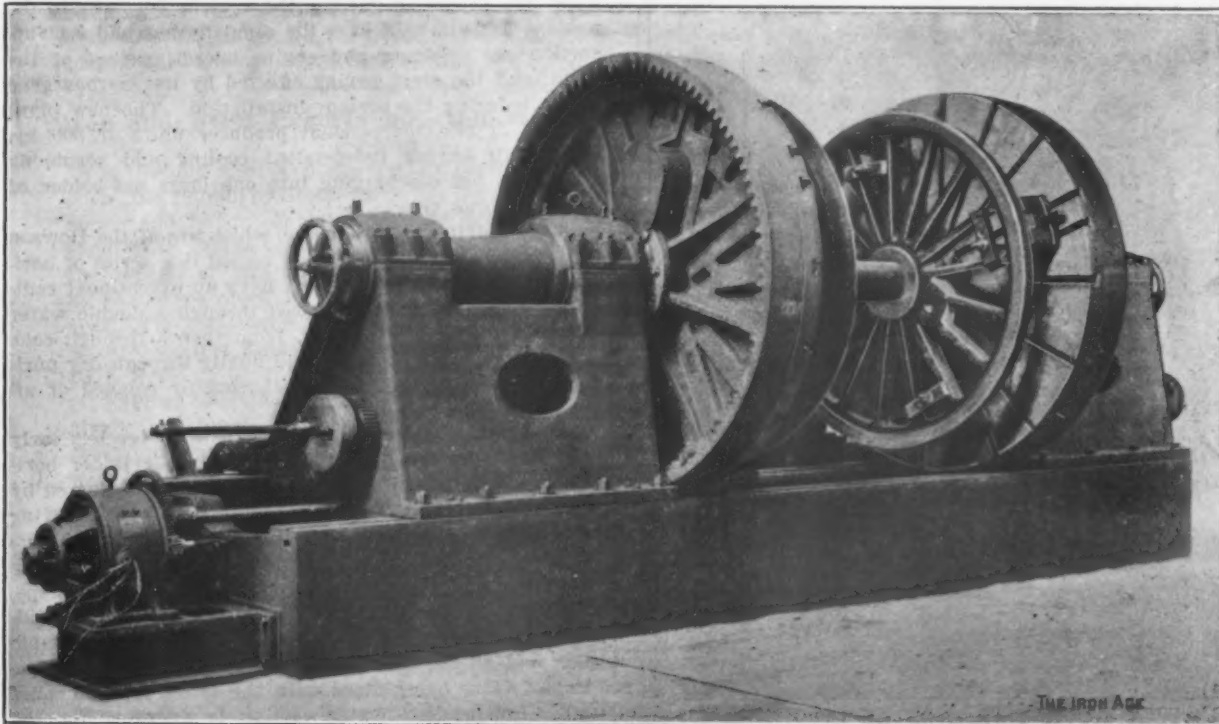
A Niles 90-in. Driving Wheel Lathe with a Pair of Wheels Secured with Teas Drivers.
